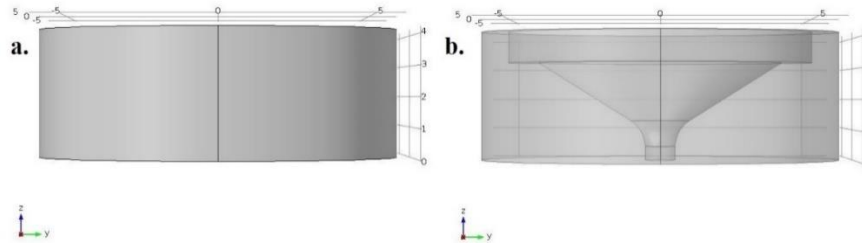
Schematic illustration of front view of lower part of prototype 9, (a. solid view, b. transparent view)
